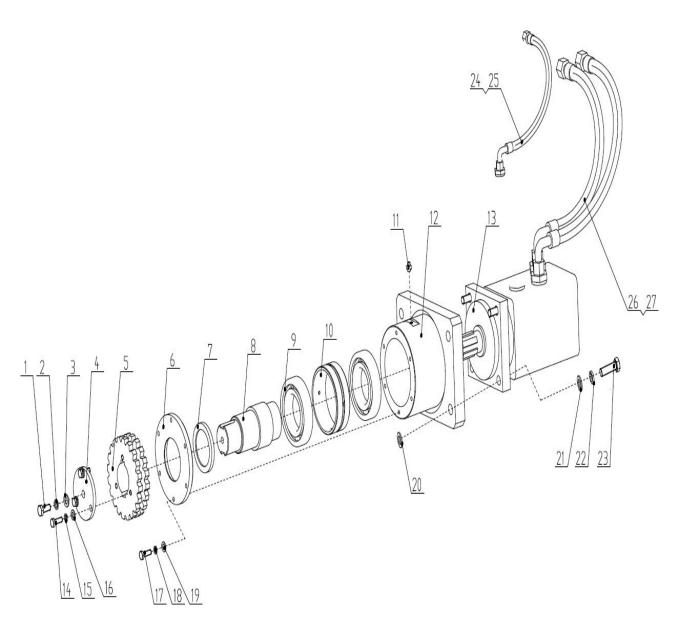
BEARING SEAT ASSEMBLIES
